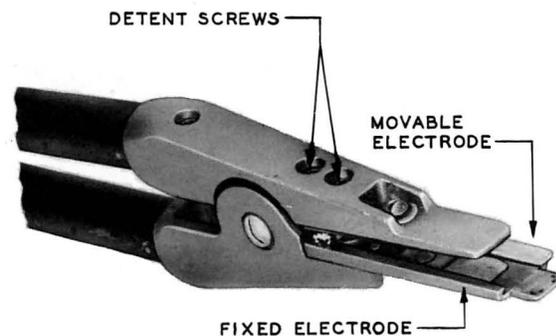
No. 577A and 577B Welding Pliers
